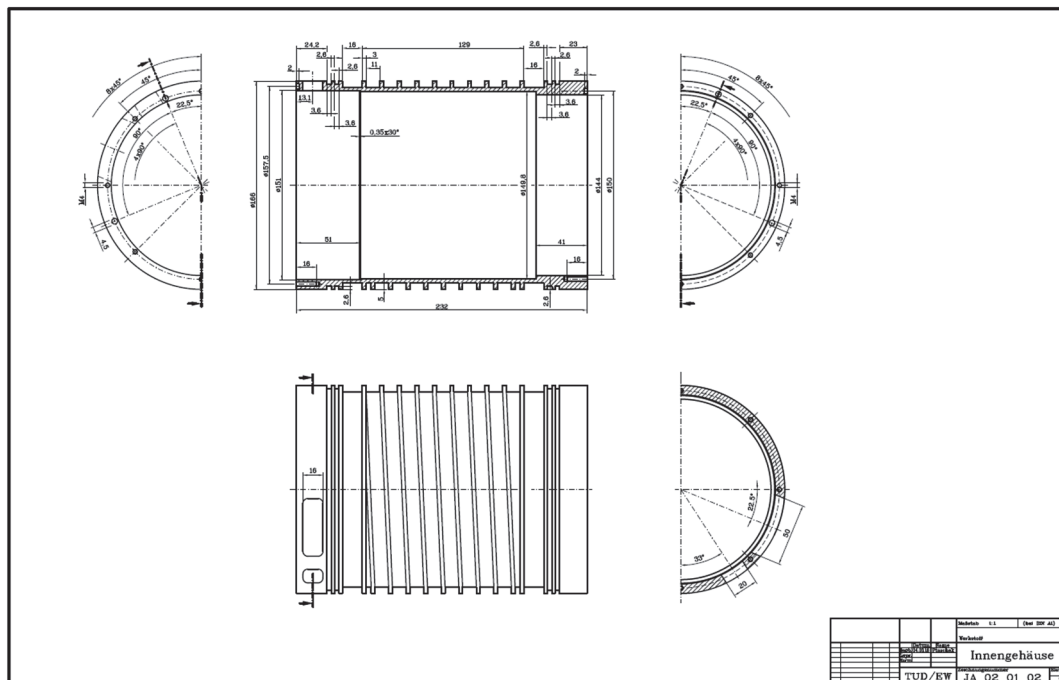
Drawing of housing inner component of the electric machine for the DE-REX powertrain (EM1, EM2, EM3, EM4)
